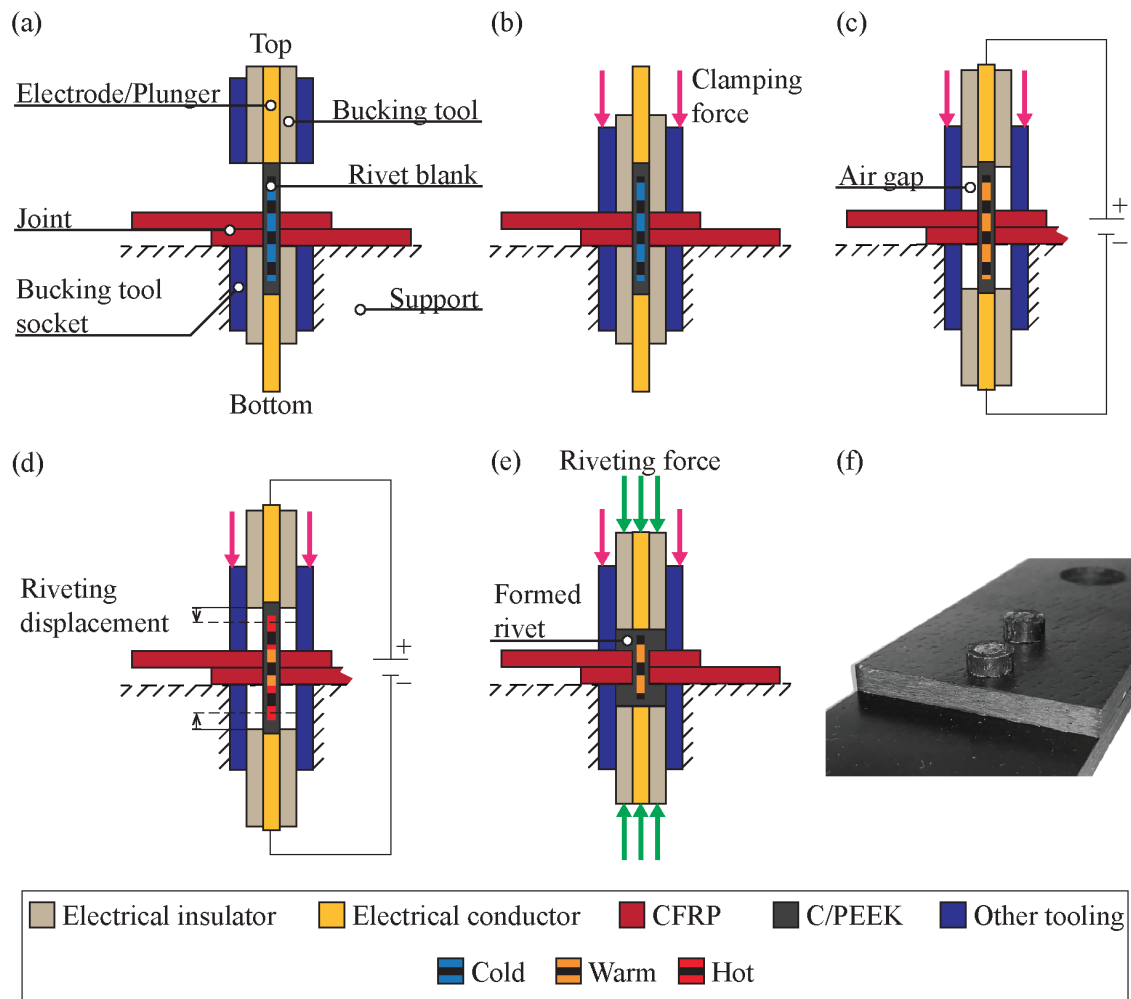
Riveting process: (a) Tooling description. (b) Rivet blank installation. (c) Rivet blank heating. (d) Rivet formation. (e) Cool down. (f) Typical riveted double fastener shear coupon per NAS1312-4.
